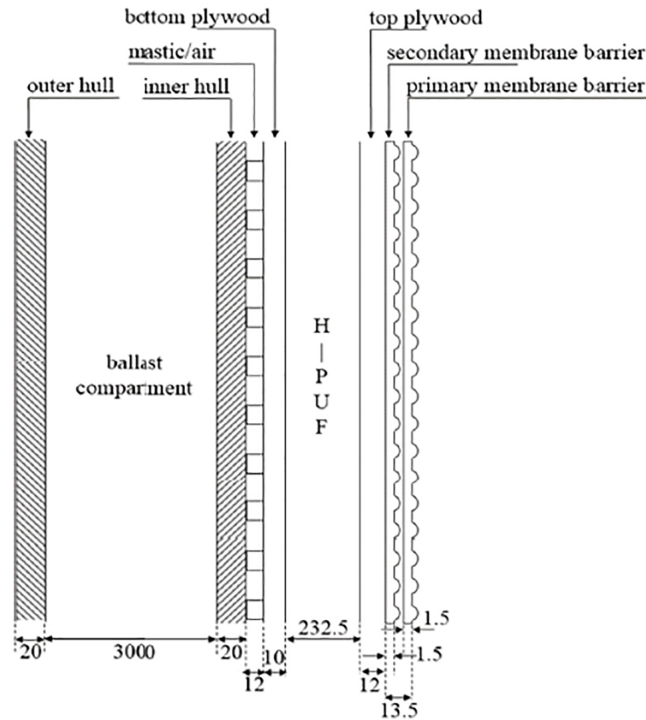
Cross-sectional wall structure of a KC-1 LNG tank, with dimensions in [mm] [38]
